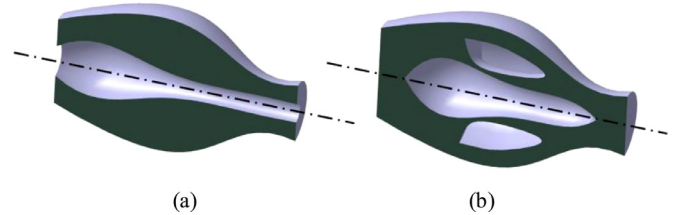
(a) Component can be manufactured by the turning process; (b) internal features that cannot be manufactured by the turning process.
